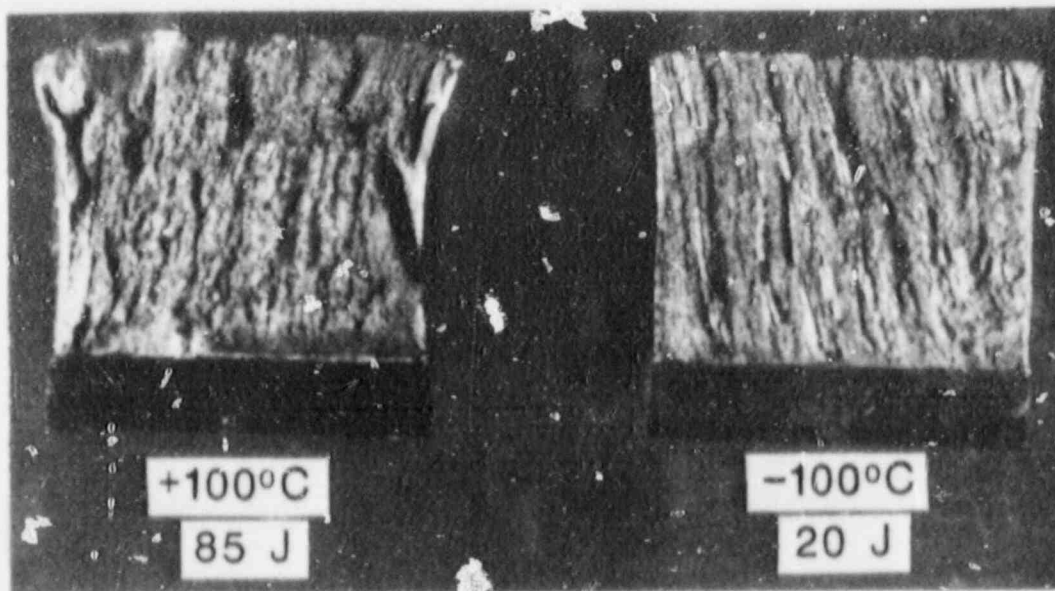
Fracture surfaces of unirradiated CVN specimens tested at upper and lower shelves.
